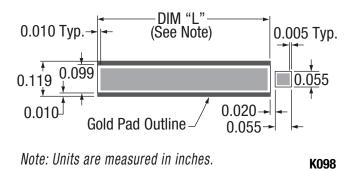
3 mm (MP) Coaxial Resonator Footpad Dimensions
